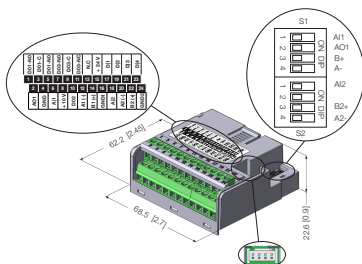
CRS485-B dimensions in mm [in], DIP-switches location and MCard connector
